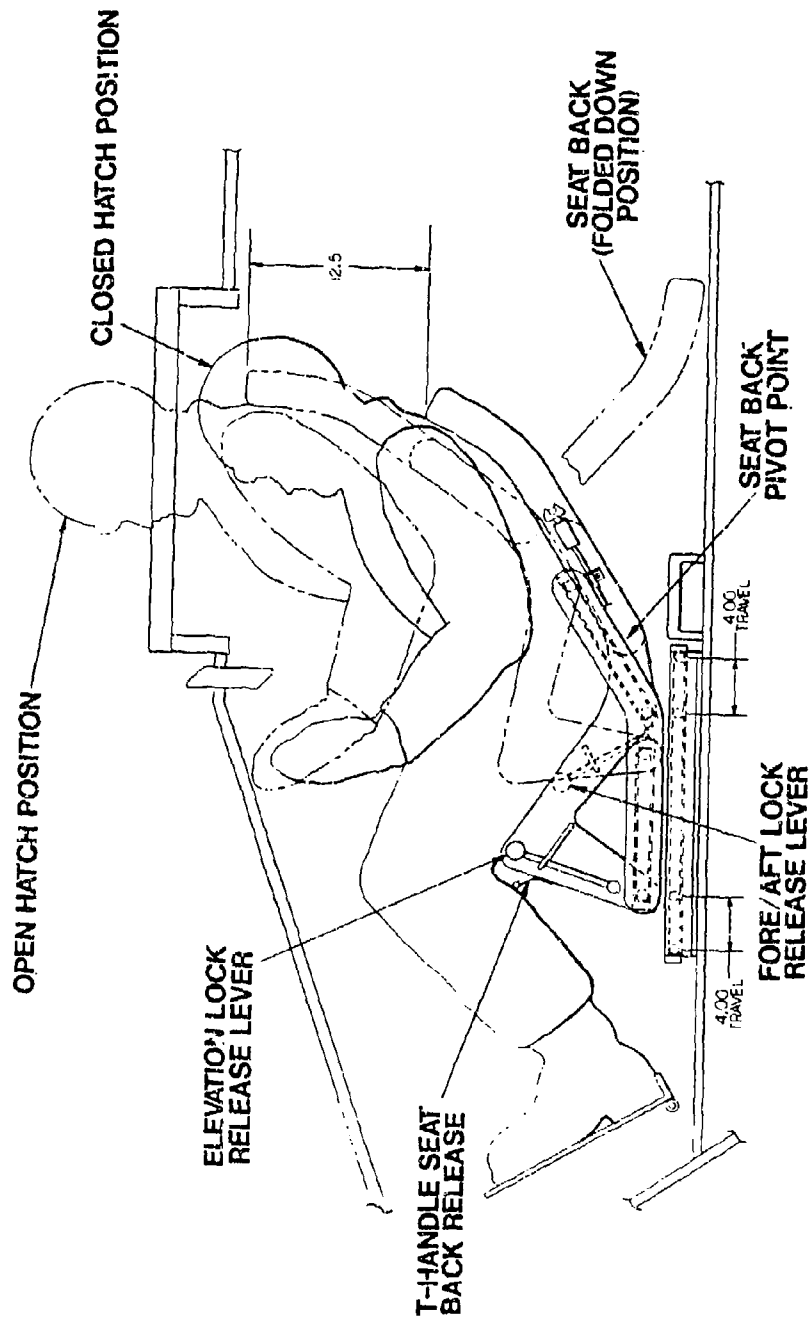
Driver's and Commander's Seat Configuration
